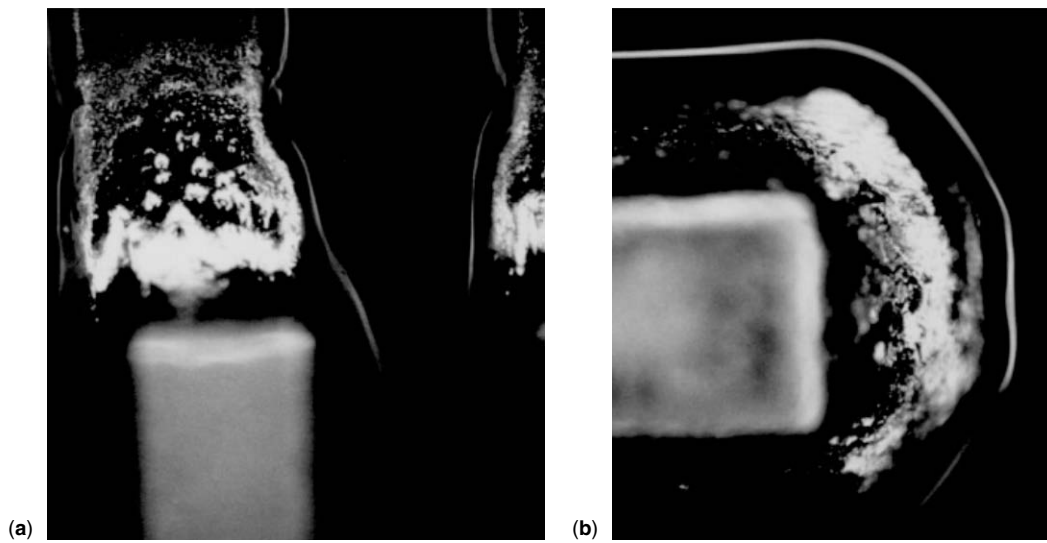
Gritty surface of solder joint for 62Sn/36Pb/2Ag on (a) Cu pads and (b) 1.5 μ Au pads
